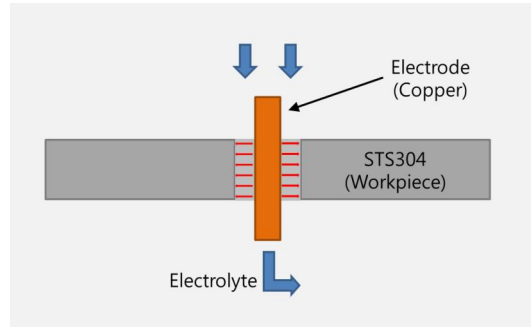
Schematic of Wire-Pulse Electrochemical Machining mechanism
